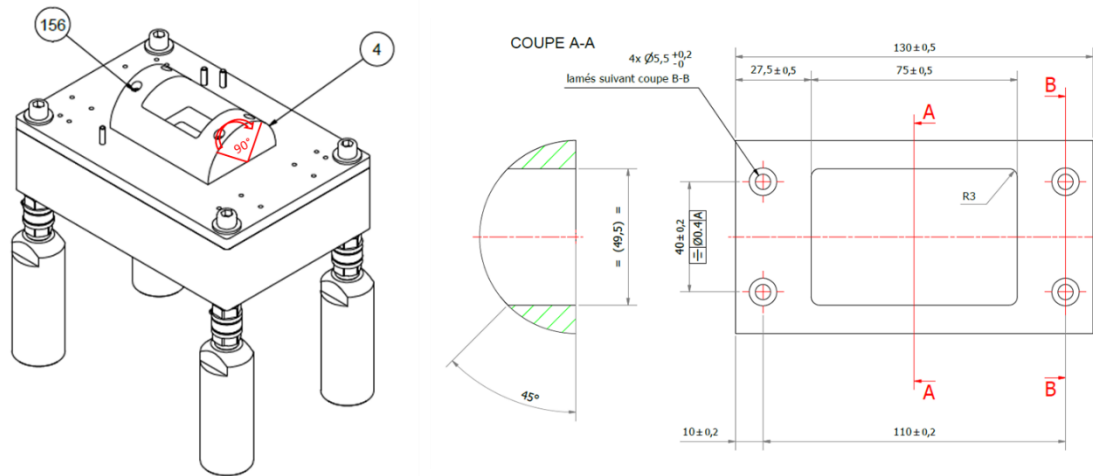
Dimensions of the fixture used for impacts on $\Phi 70$ mm curved coupons
